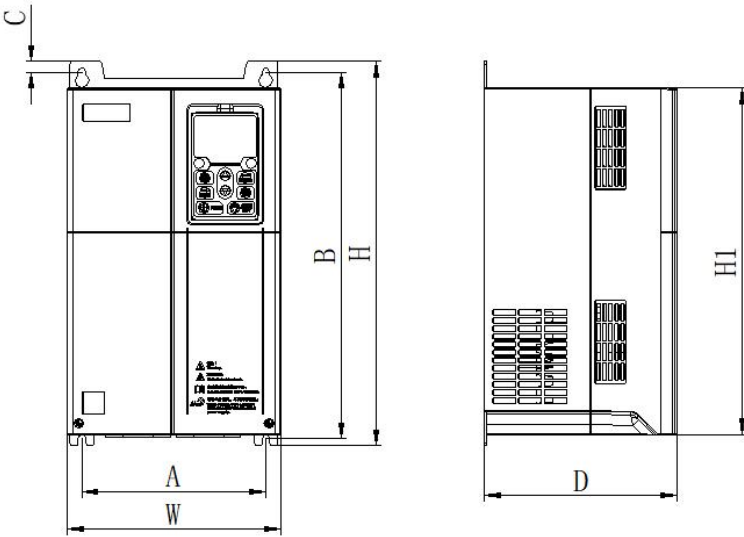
11~22 KW Plastic Casing External Dimensions and Installation Dimensions Diagram
